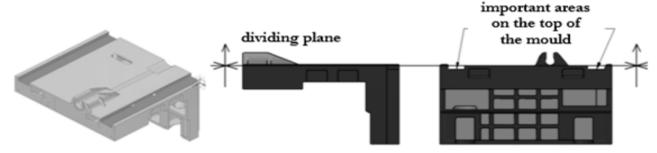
Spindle WHR 13 (Q) and used casting position in the foundry mould
